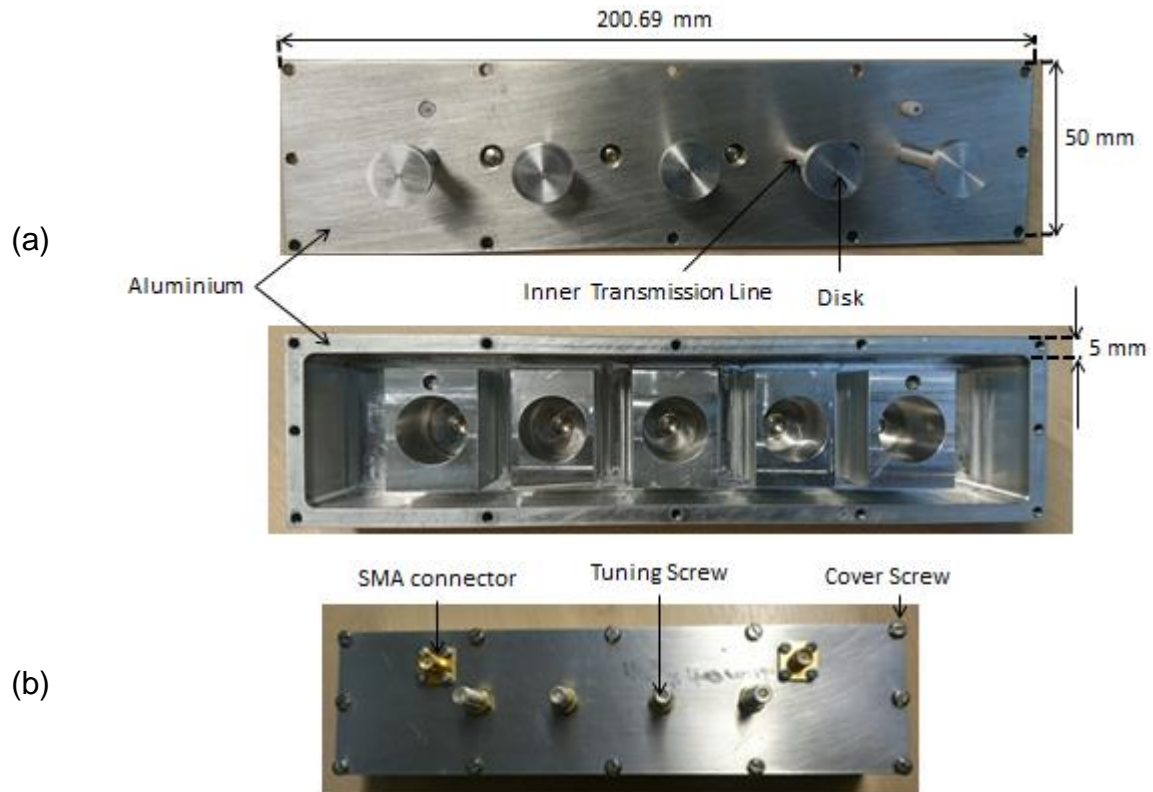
Photo showing a fabricated re-entrant bandpass filter (a) filter with top cover removed (b) assembled filter with input and output connectors
